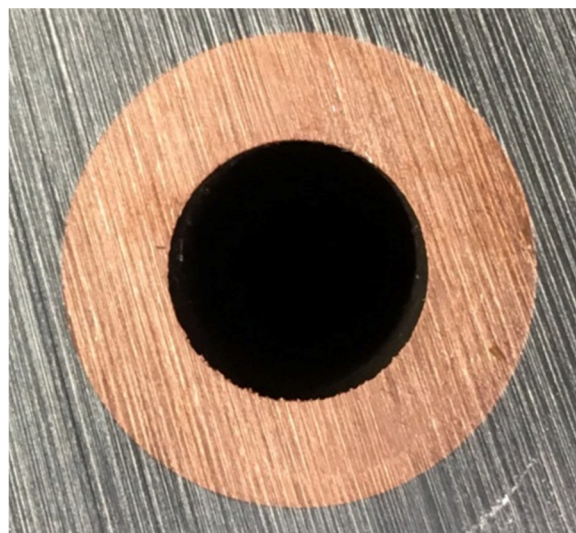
Explosion bonded copper tubing inside stainless steel tubing.
